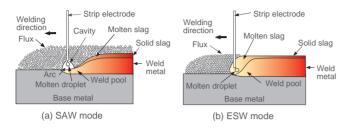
Concepts of overlay welding processes (SAW and ESW) with strip electrodes.
